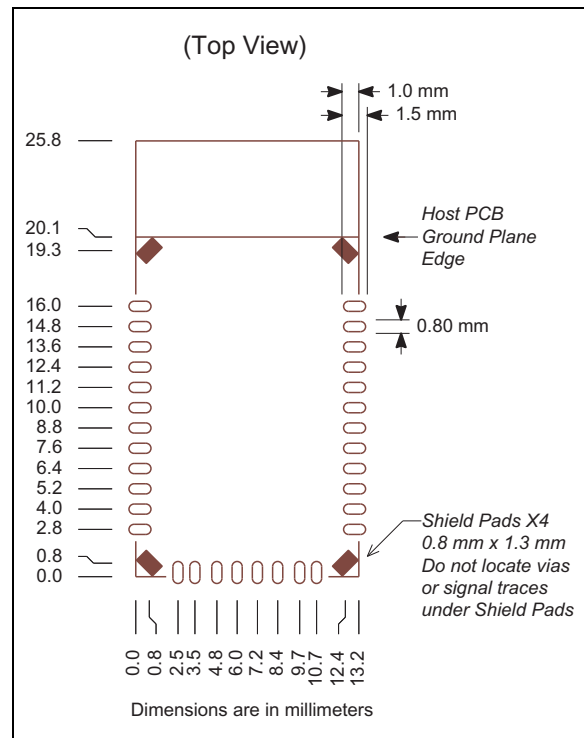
RN-41N RECOMMENDED PCB FOOTPRINT
